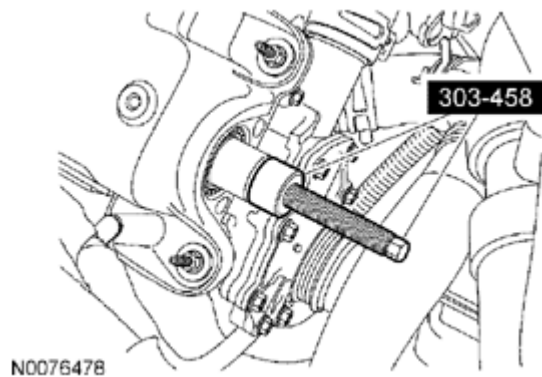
Installing Camshaft Pulley Installer In Camshaft
